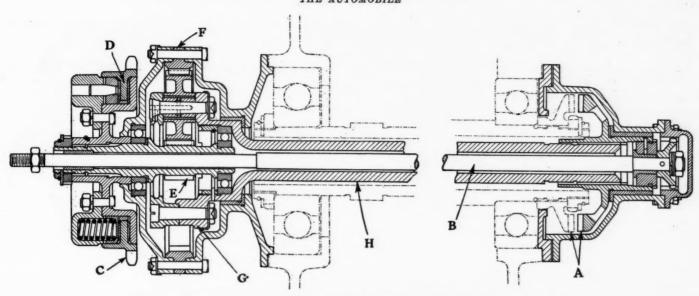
Arrangement of epicyclic starter gear on secondary transmission shaft
